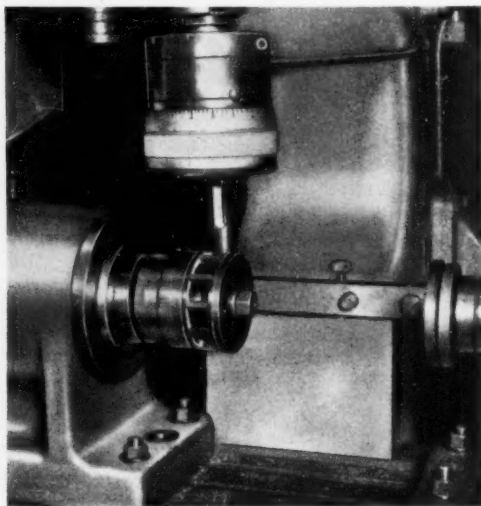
An Armag Profile Boring Head, Set-up on an Archdale Vertical Milling Machine, is Employed for Machining Radial Roller Pockets Prior to Broaching, as Here Shown
